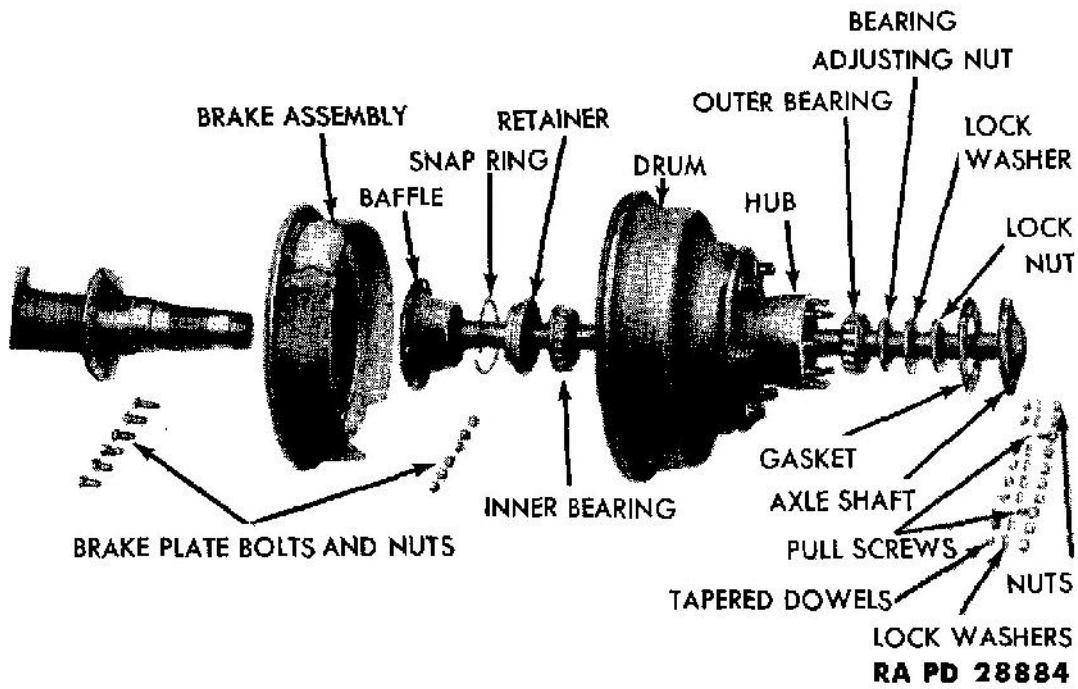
Rear Axle Shaft and Brake Assembly — Disassembled
